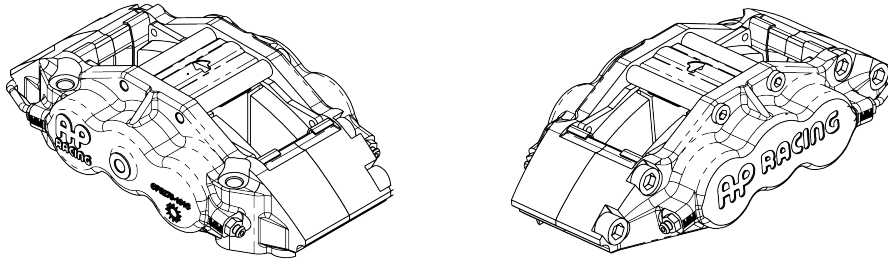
Technical drawing of a racing braking caliper: AP Racing CP5570
